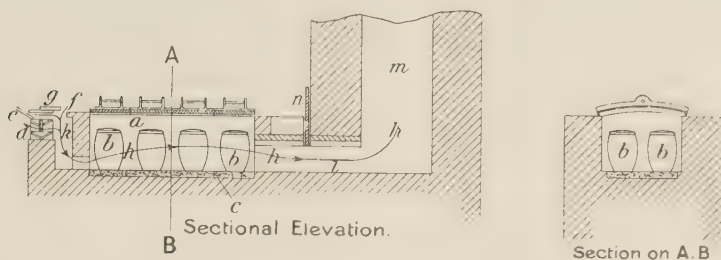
Improved Type of Nobel Liquid Fuel Crucible Furnace.
